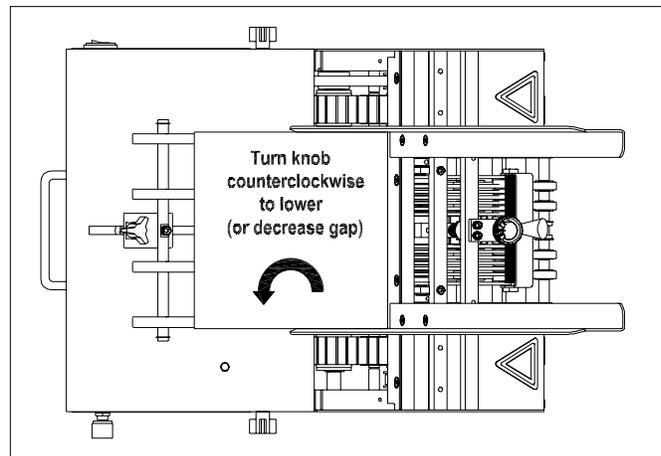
Adjusting Gate Assembly for Correct Gap
